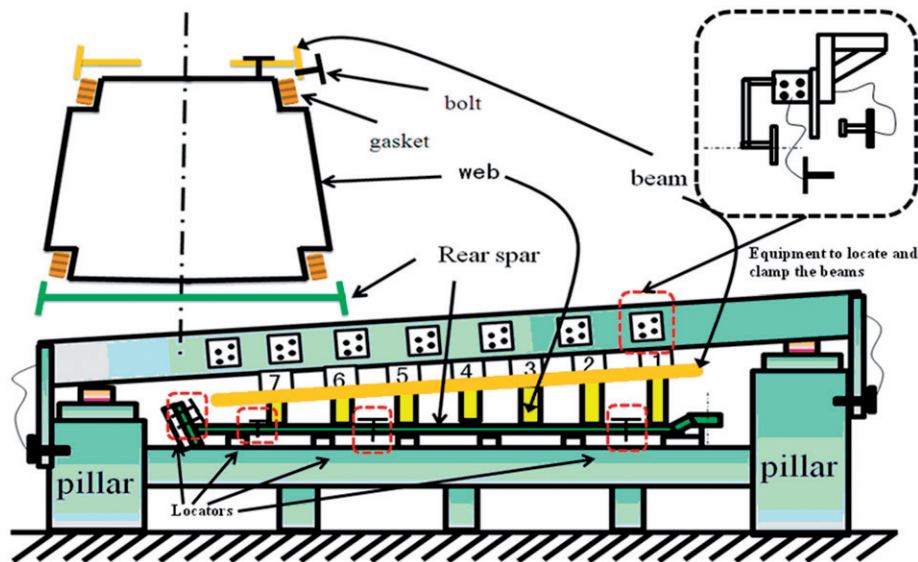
Fixture scheme in aircraft horizontal stabiliser assembly process.
